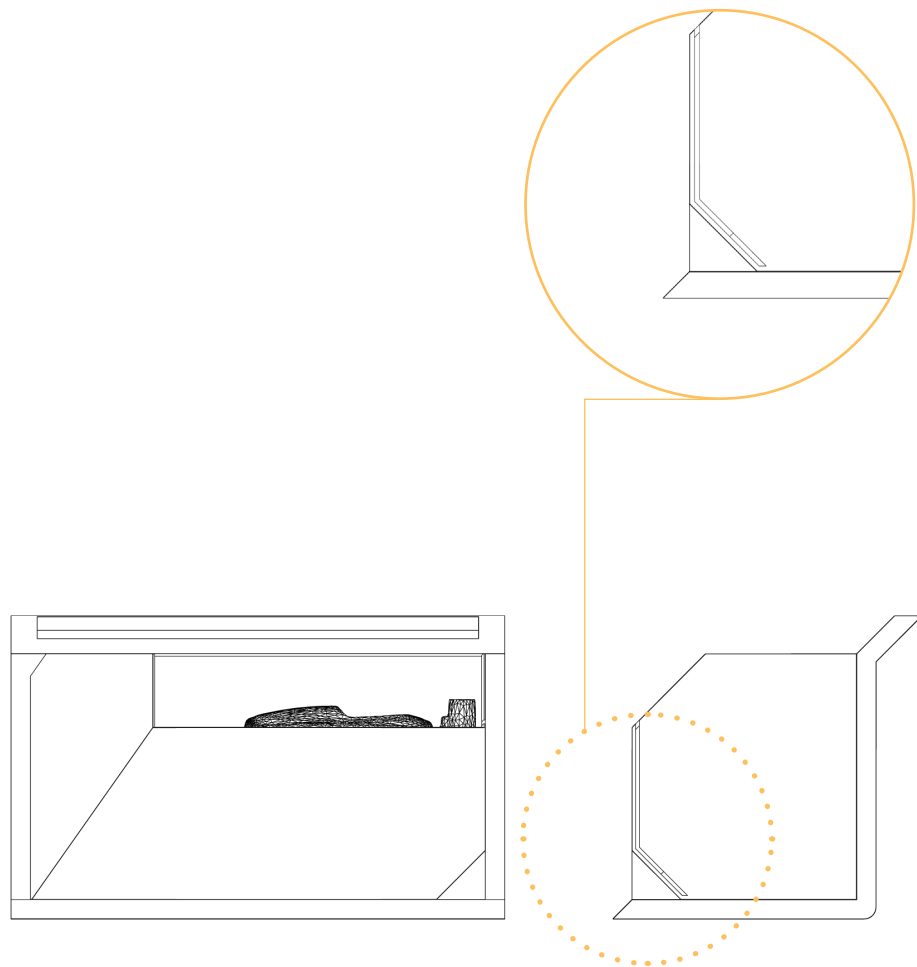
Tom's Sleeve Details. Front & side view showing the overall structure angles of the sleeve. Close-up section shows the cut out open channel for the power cord.
